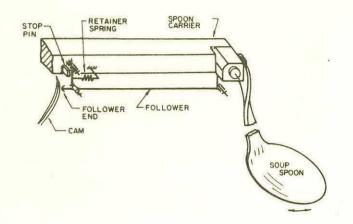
Spoon Rotating Attachment Mechanism to Maintain Partially Full Spoon When Transferring Liquid Food
